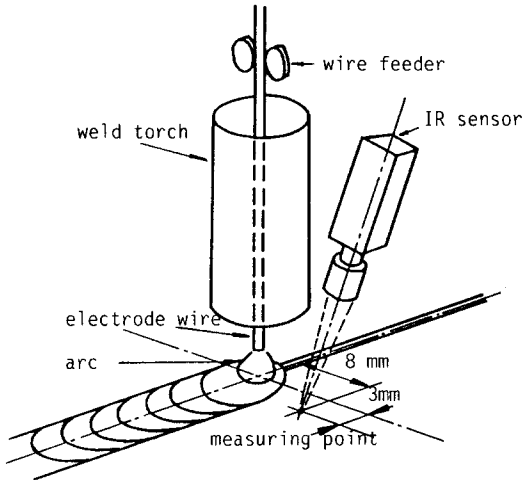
Schematic diagram of arc welding process and IR sensor
